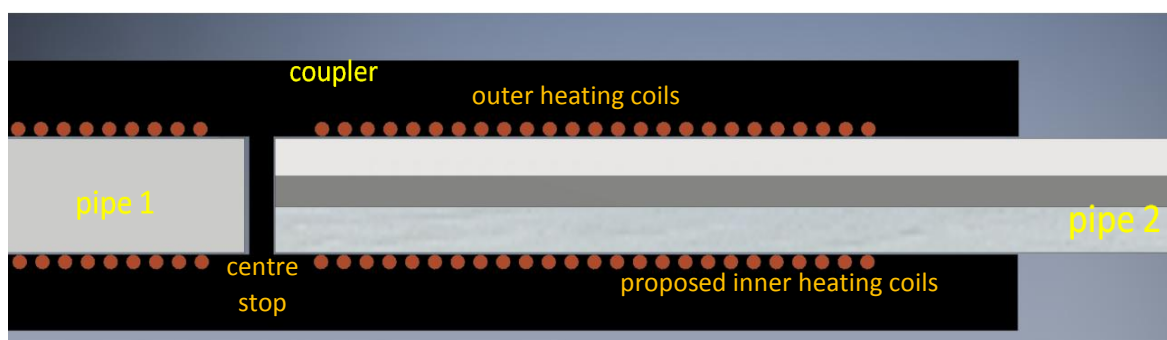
Proposed concept of an EF coupler to weld both the outer and inner plastic layers.
